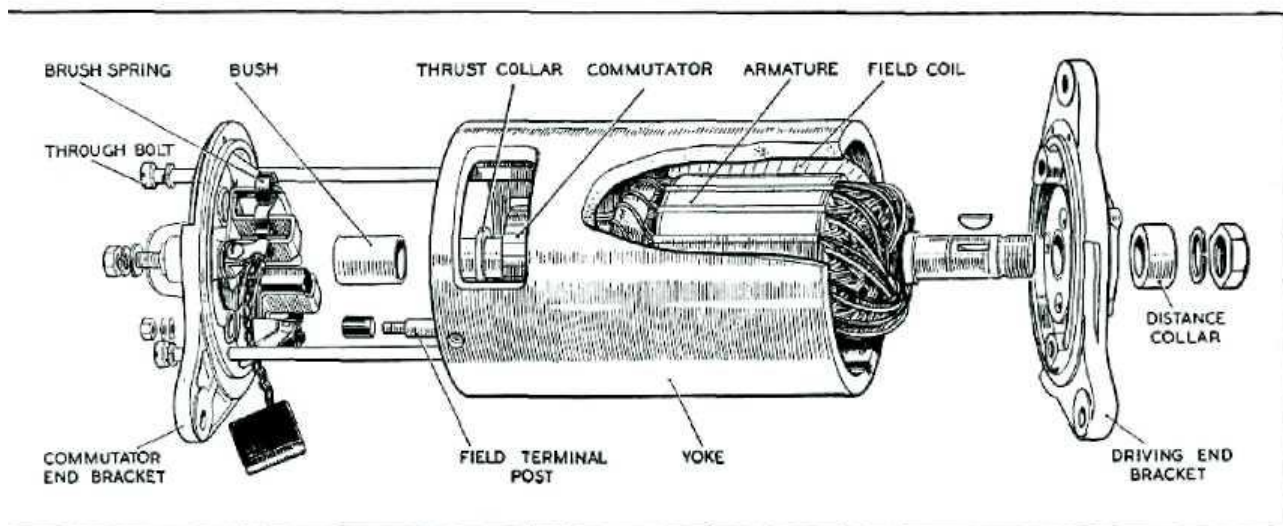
Dismantled view of Generator with Yoke cut away.
